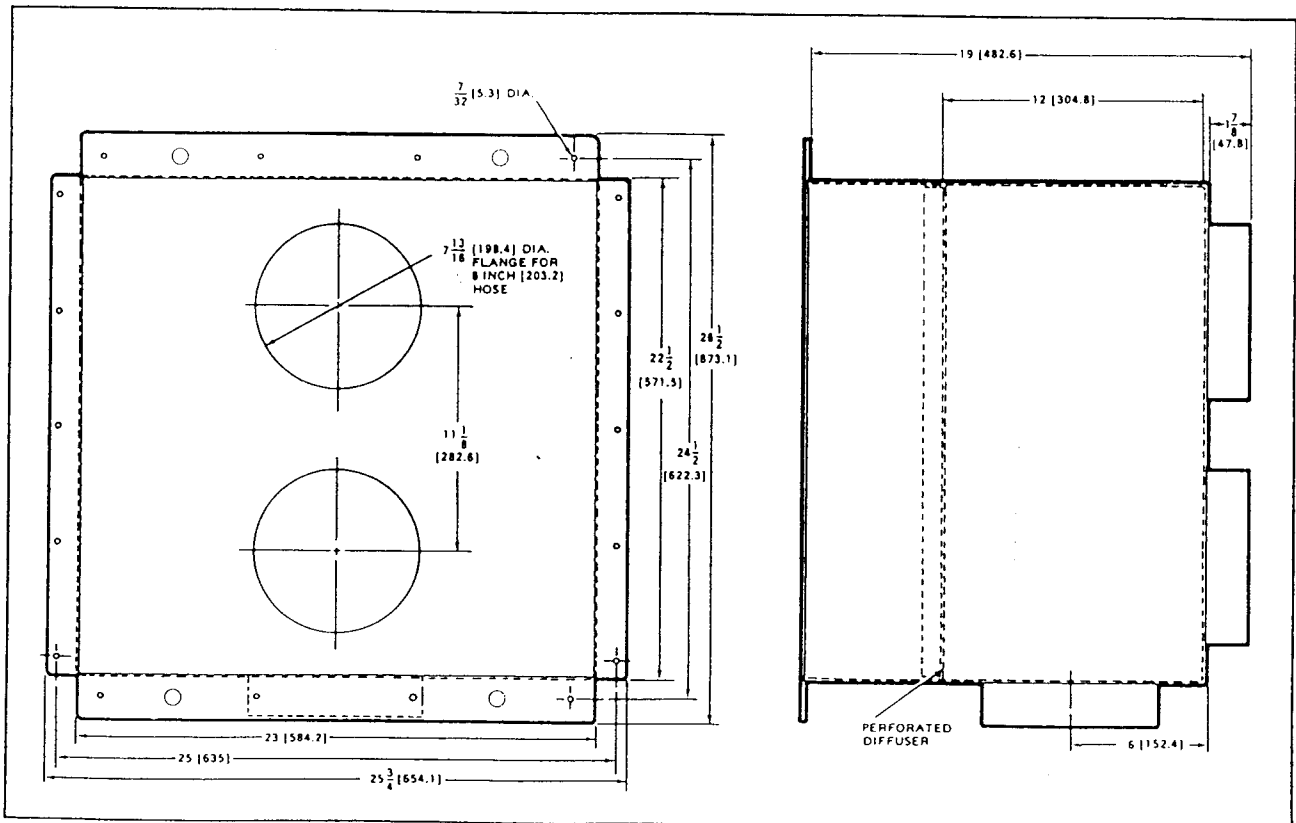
Source Capture Plenum dimensions in inches [millimeters in brackets]
